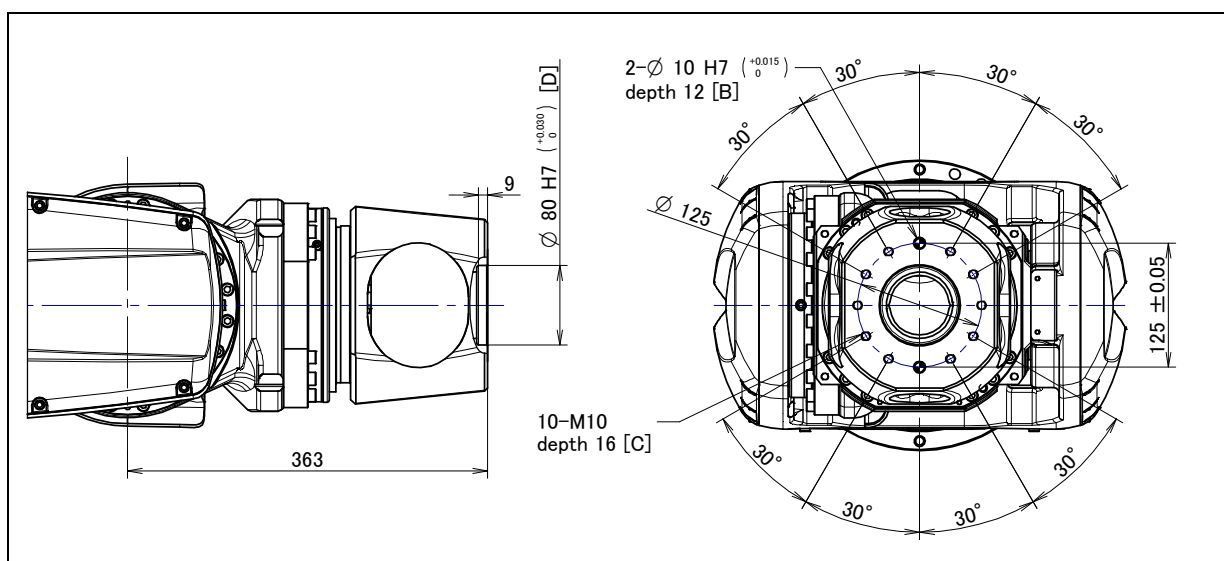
(c) End effector mounting face (Bracket flange)
